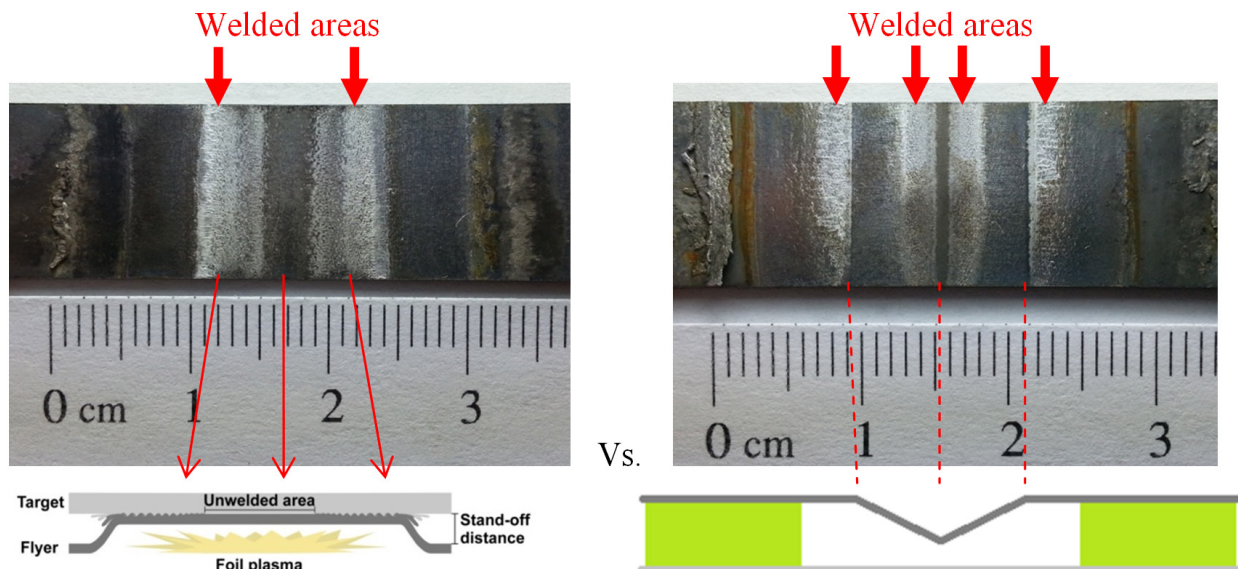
Peeled fracture surfaces of a flat-on-flat weld (left) and a tent-shape-target weld (right).
